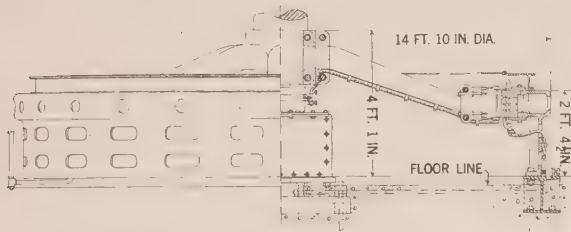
CROSS-SECTION, SYNCHRONOUS MOTOR FOR POLISHING MACHINE
